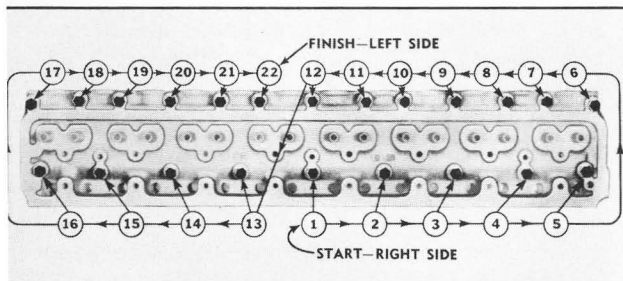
Cylinder Head Bolt Tightening Sequence
